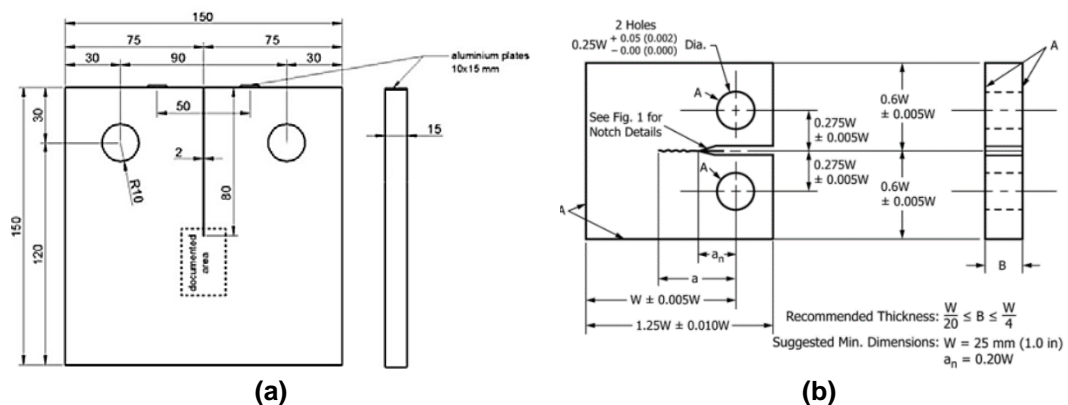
Geometry of the Compact Tension (CT) specimen [31, 32].
